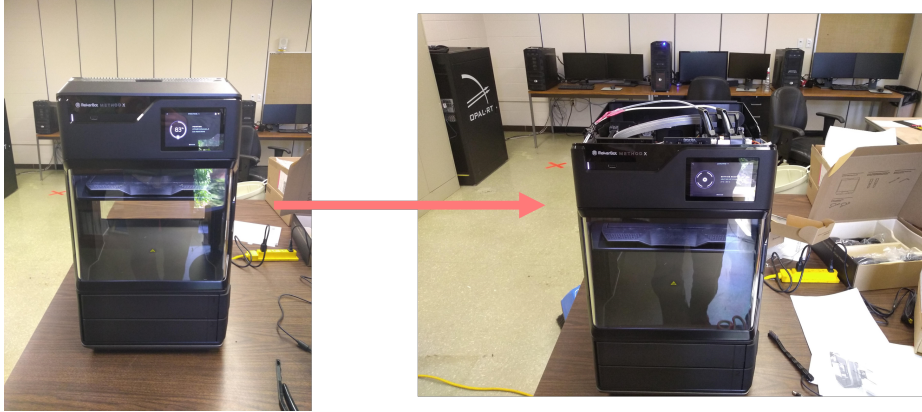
Makerbot Method X fully assembled on the left and a slight disassembly of the plastic accessories on the right.
